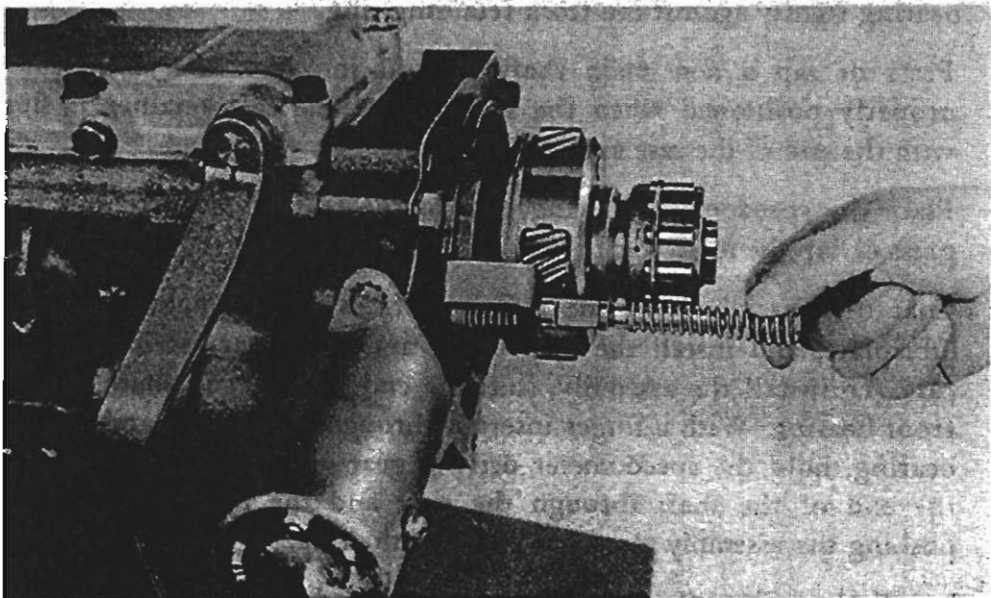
Main Shaft Oil Seal Properly Positioned.
